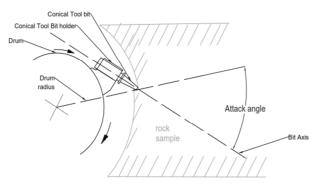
Mounting of tool bit on cutting drum [8, 16]
